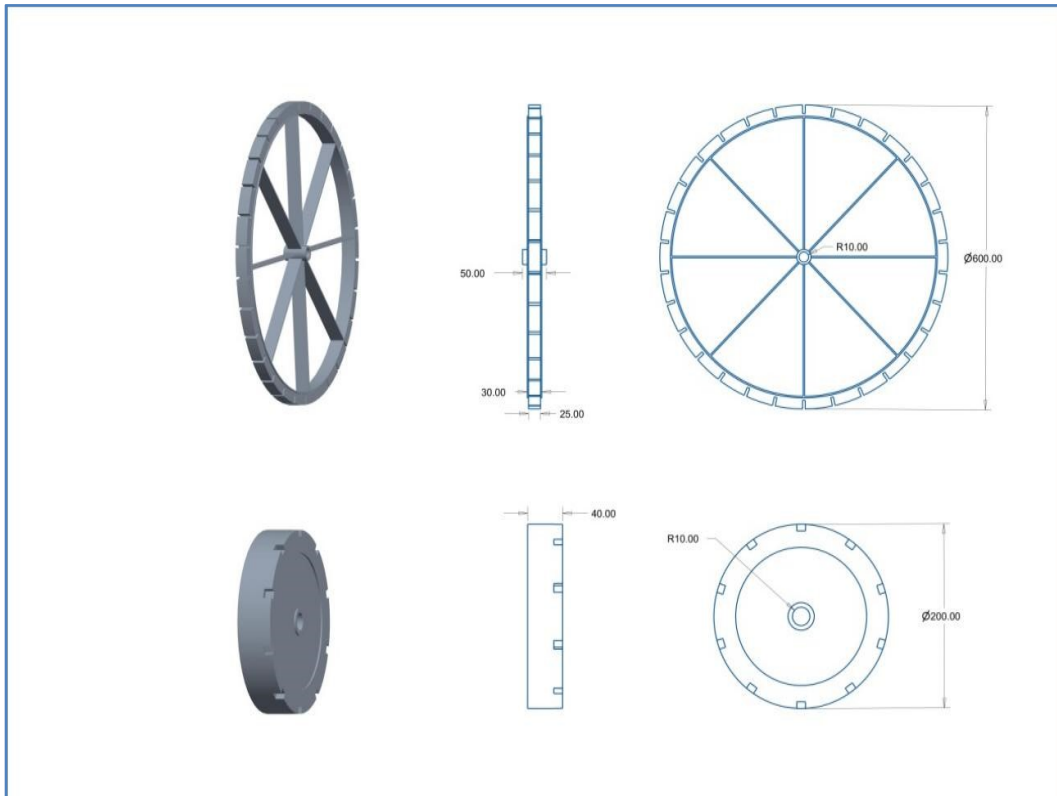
Dimensions of front and rear wheel of leafy crop harvester
